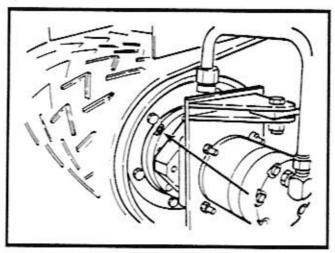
Conveyor Drive Motor Carrier Bearings
